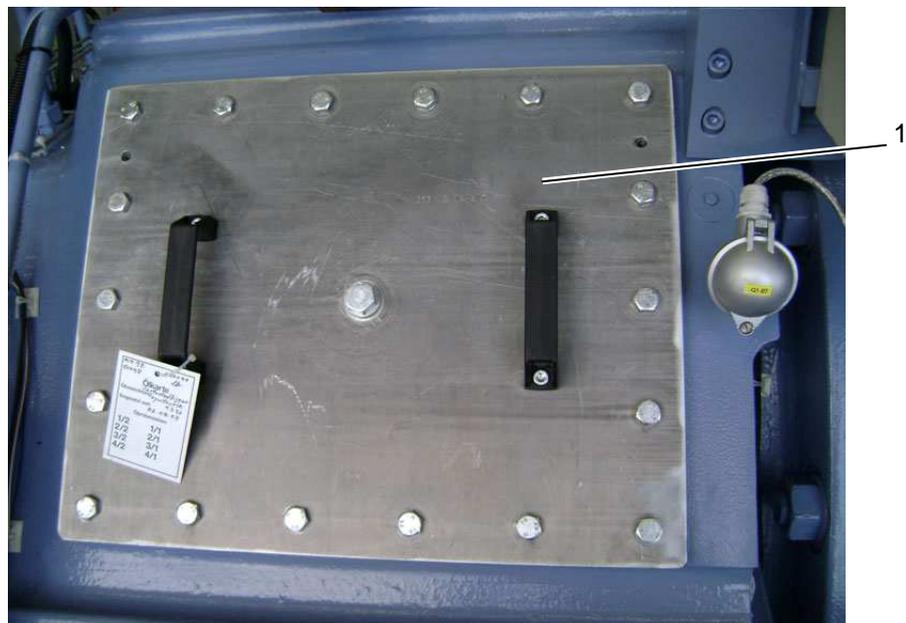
1E Inspection cover (manufacturer Eickhoff)
